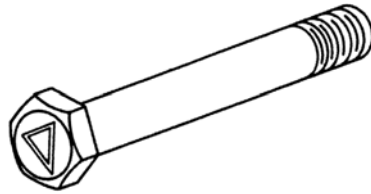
, AN173 - AB186 Close Tolerance Bolt
